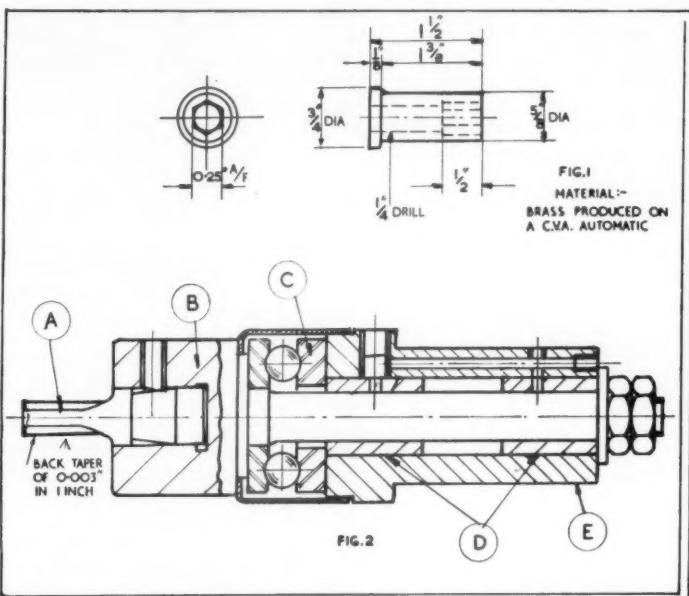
Simple plugs where the hole extends through the article or similar oil drain plugs with blind holes are typical automatic jobs where drilling is possible. In this example the hexagon hole only partially enters the plug. Fig. 2.—The drilling tool for use in an automatic cycle; drillings carry oil to the rear bearing when the holder is secured to the turret; A, tool. B, tool holder. C, thrust race. D, bearings. E, holder
